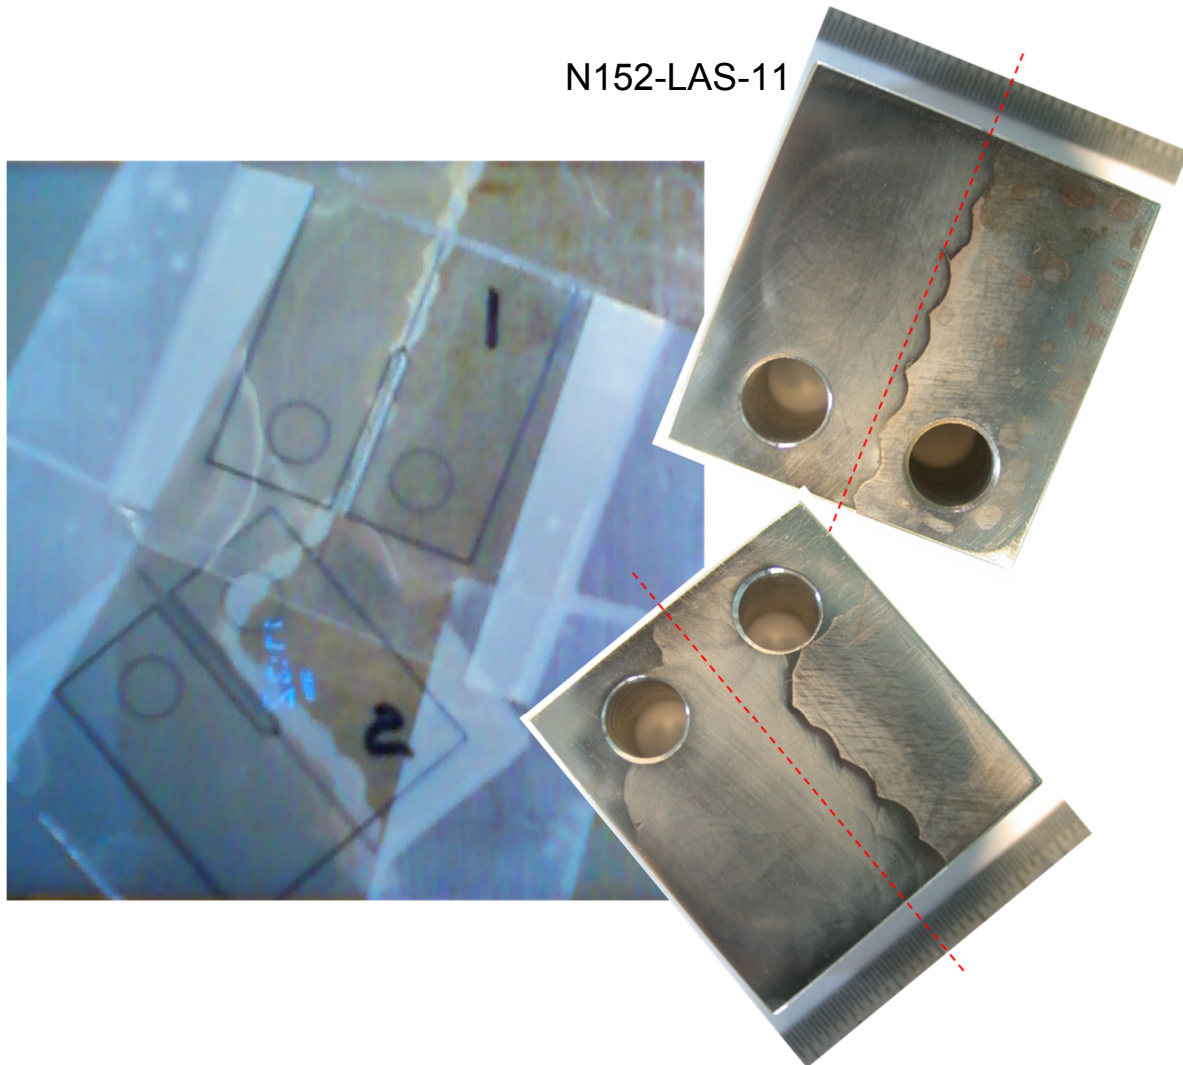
Approximate locations of the CT specimen blanks for first layer and second layer weld butter SCC CGR testing. The specimen blank that will later become CT test specimen N152-LAS-11 is indicated in the figure.
